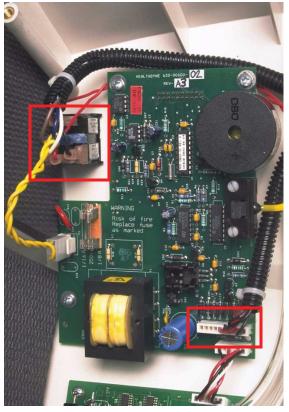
FIGURE V: POWER SWITCH AND MAIN PCB J1 LOCATIONS
